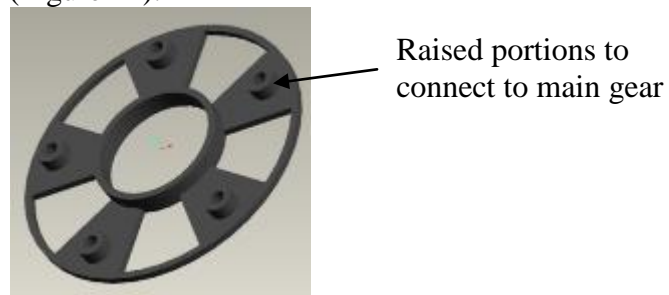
Spider bracket driver that houses the thrust bearing and connects to the main gear
